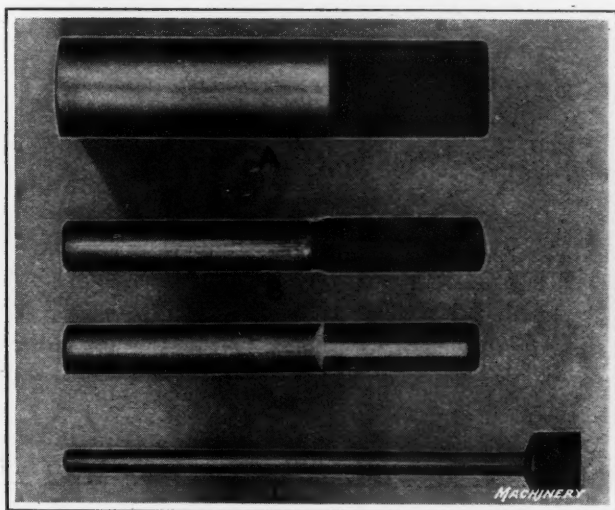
Several Types of Abrasive Wheels manufactured by the Dawsearl Tool & Machine Co.
